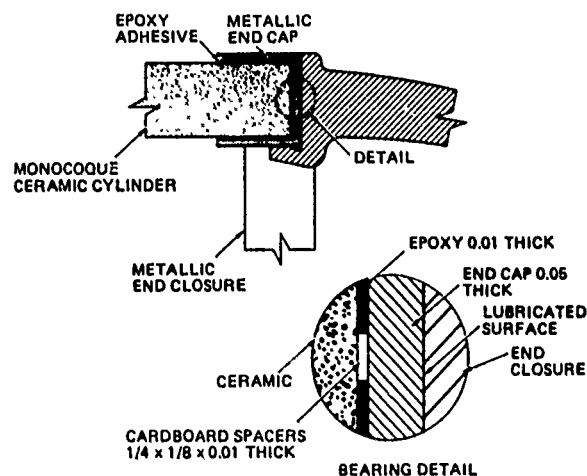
Encapsulation* of Ceramic Bearing Surfaces Performed by NOSC on Their Second-Generation Ceramic Housing Designs. Encapsulation Extended the Fatigue Life of Ceramic Bearing Surfaces Beyond 2000 Pressure Cycles.¹⁹
